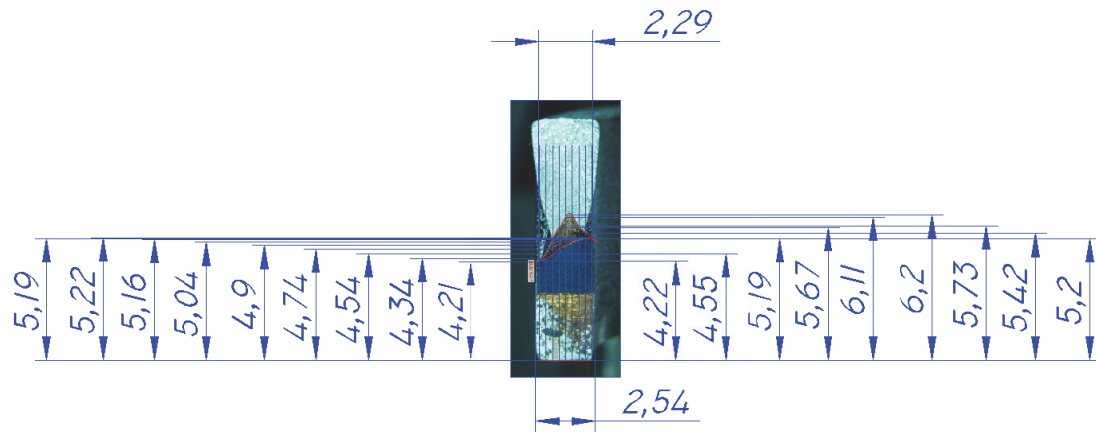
Determining the crack length on fracture surface and enlarged view of the final crack front - example: specimen S-BM(89)-10C
